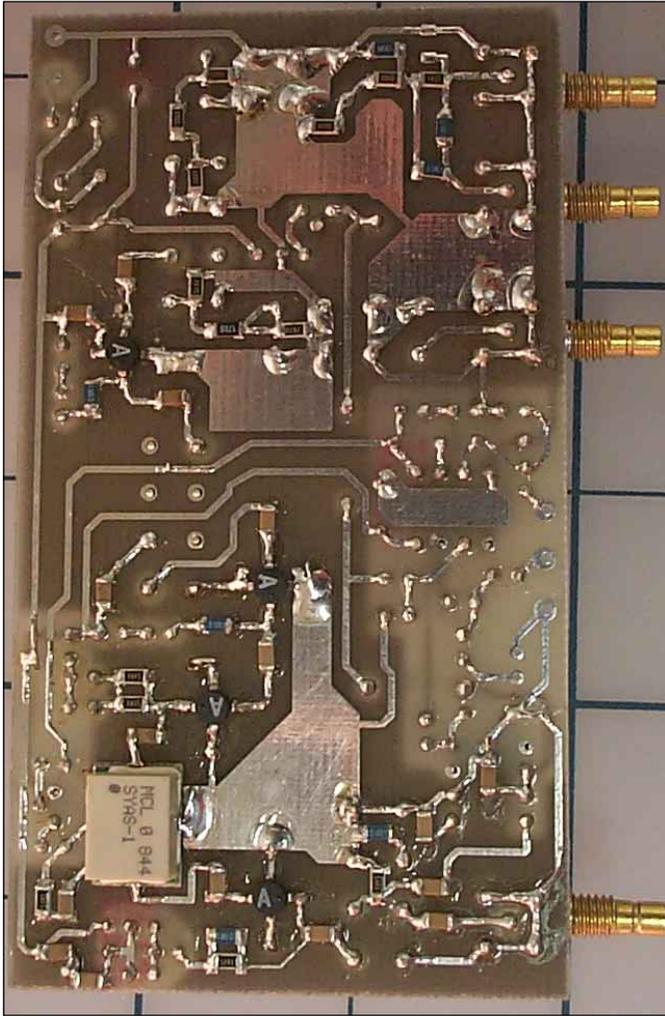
The SMT components are attached to the solder side of the PC boards. This is a view of the Mixer board solder side showing SMT construction.
